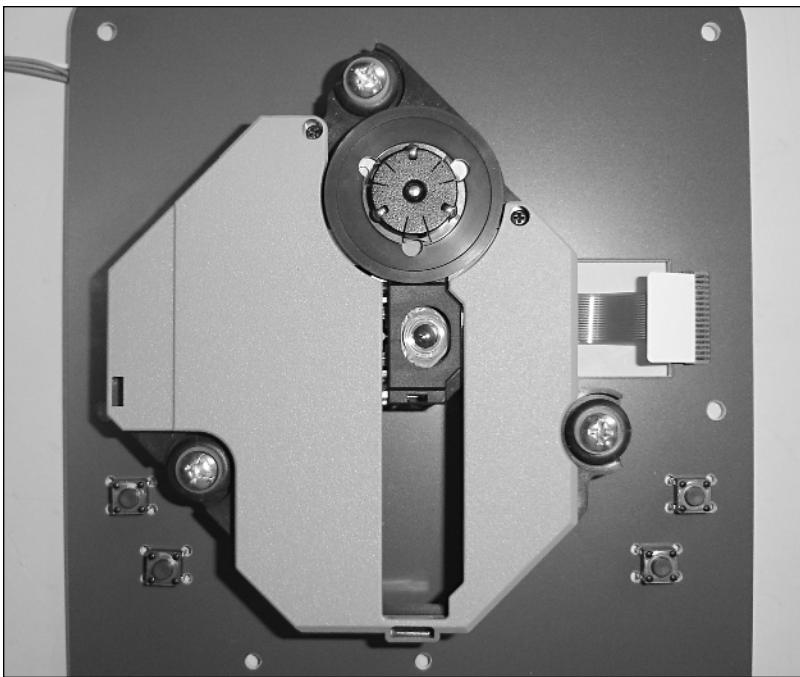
The CD-ROM drive installed onto the rear plate.
